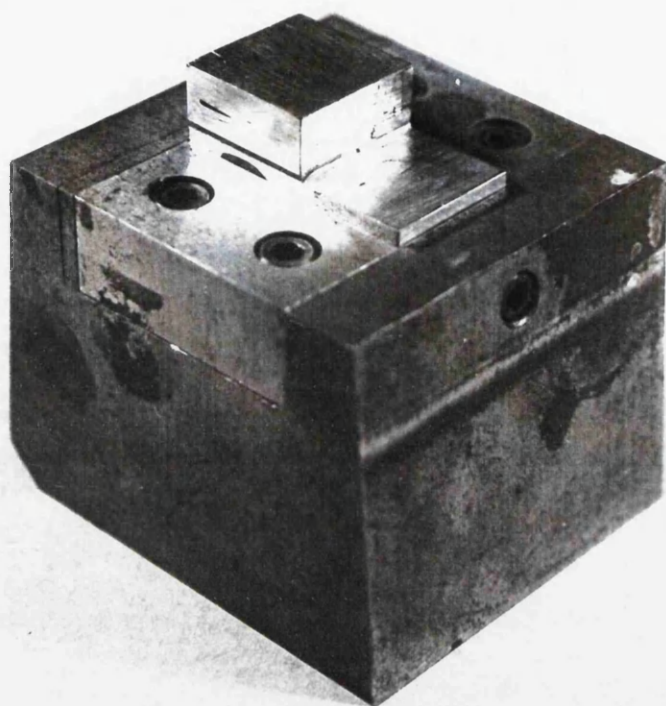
HOLDER FOR SHEAR IMPACT SPECIMEN
